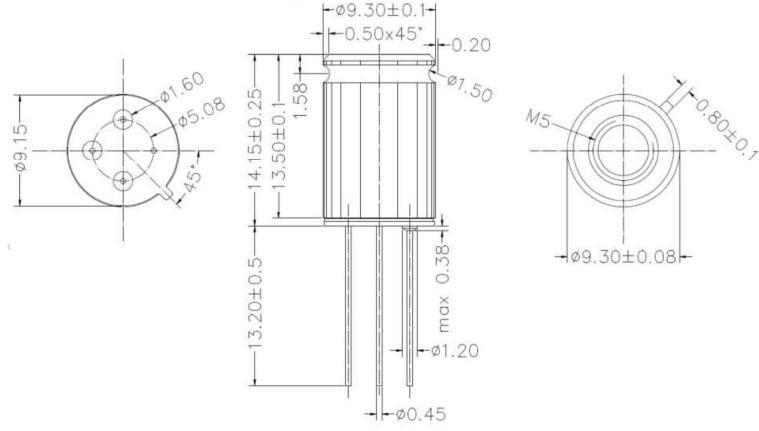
dimensional drawing of the HTPA16x4R1L5.5EA
